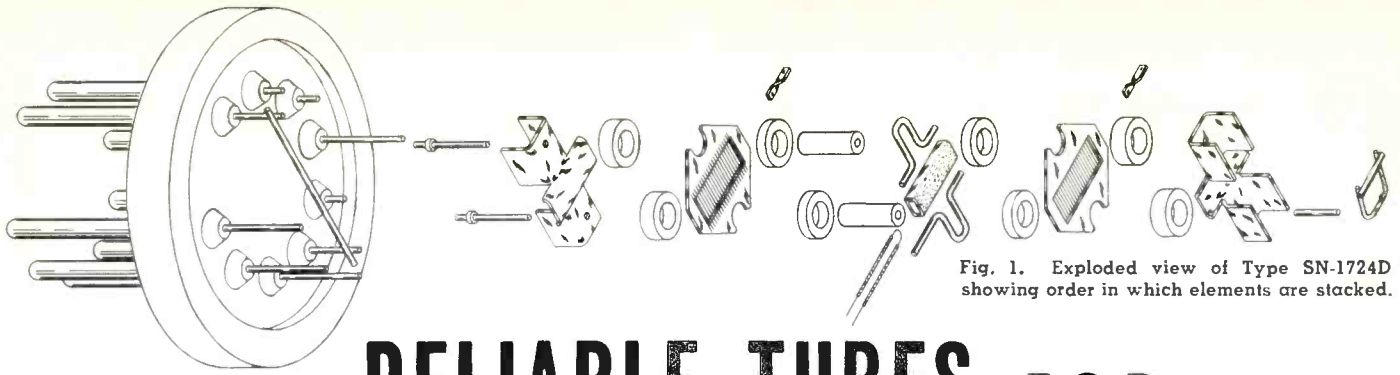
Exploded view of Type SN-1724D showing order in which elements are stacked.
